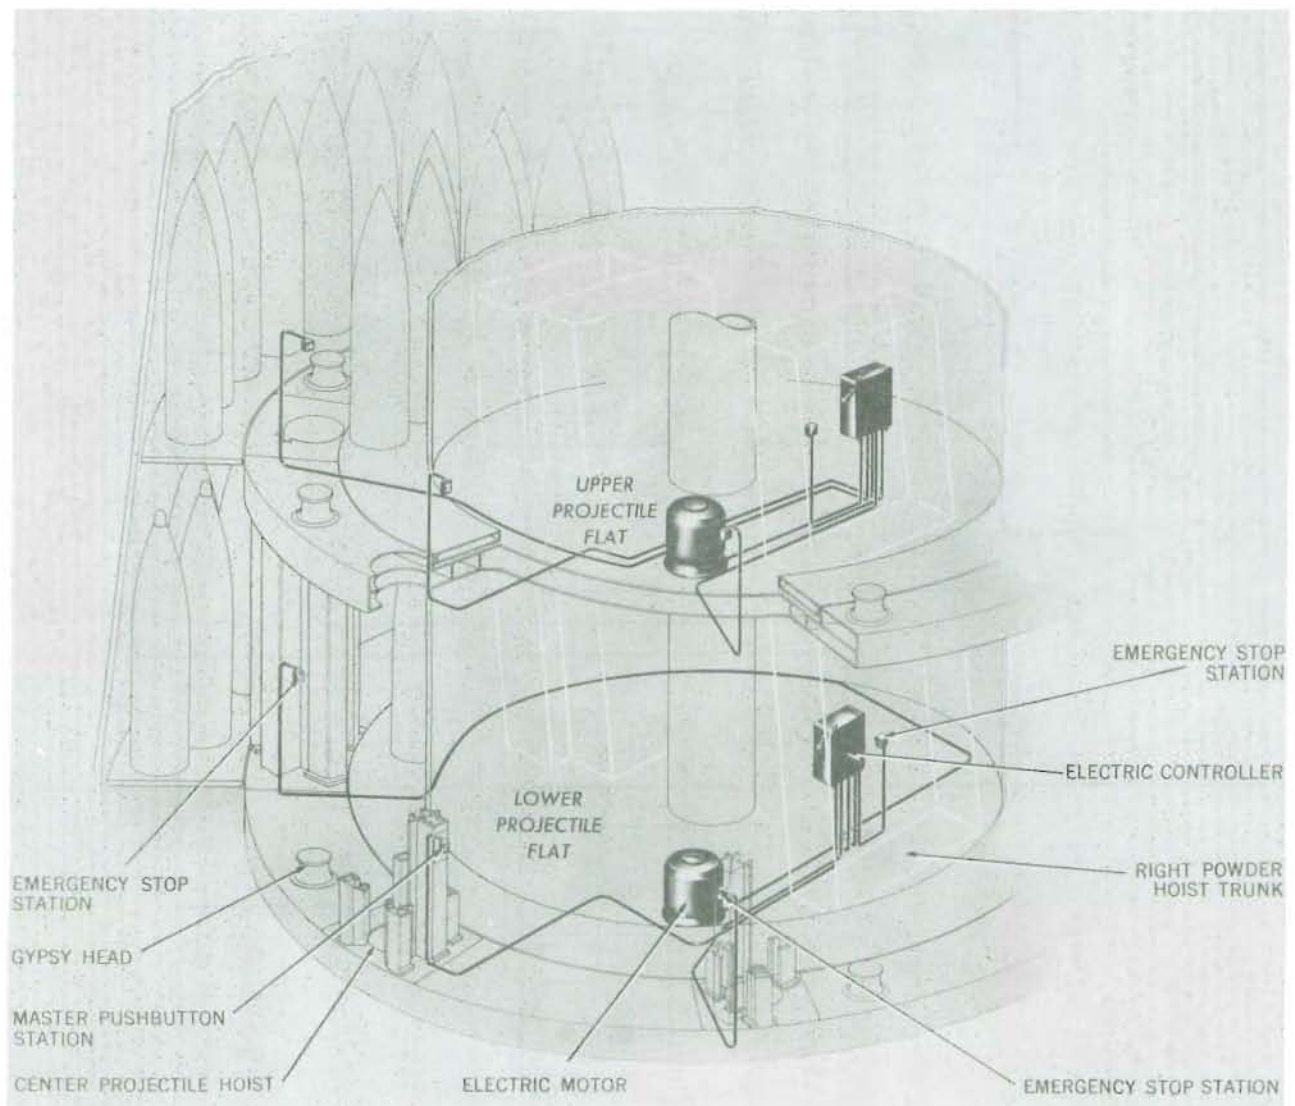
Parbuckling Gear Electric Installations, General Arrangement
